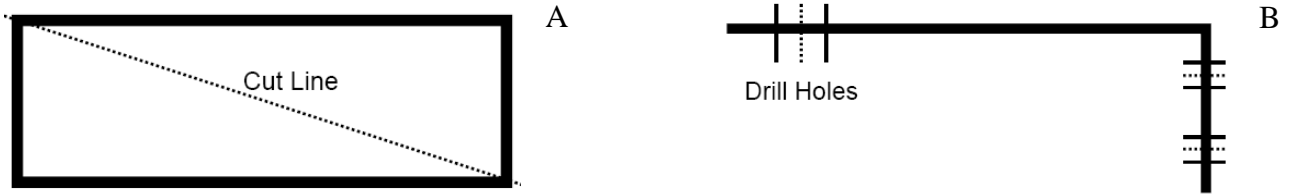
Manufacturing of Main Support and Extending Mechanism
